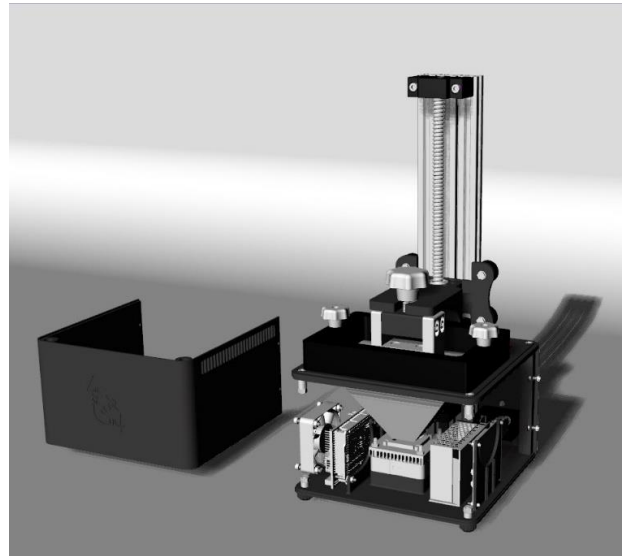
Full design of the high resolution 3D printer FabLab ULL.
